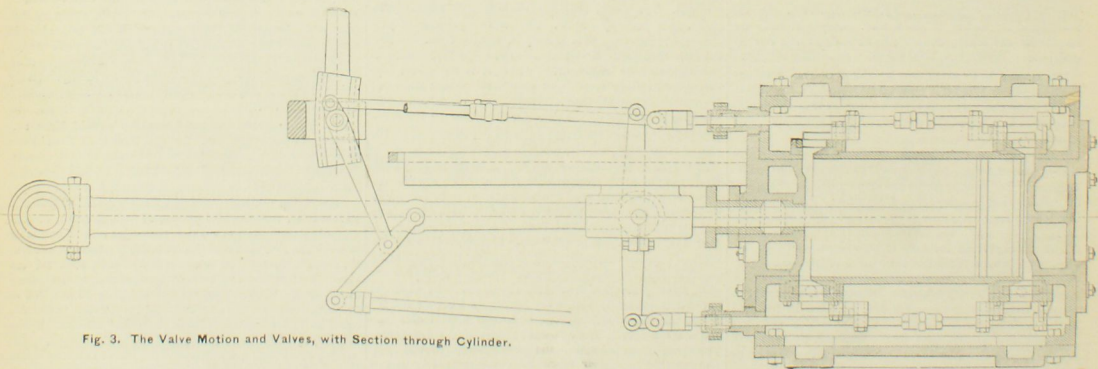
The Valve Motion and Valves, with Section through Cylinder.
